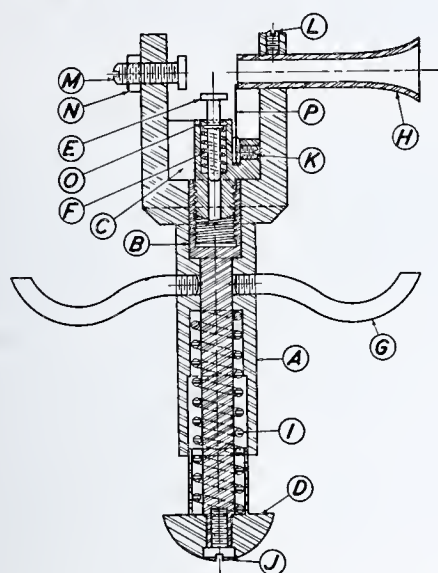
ASSEMBLY OF SODIUM CUTTER
